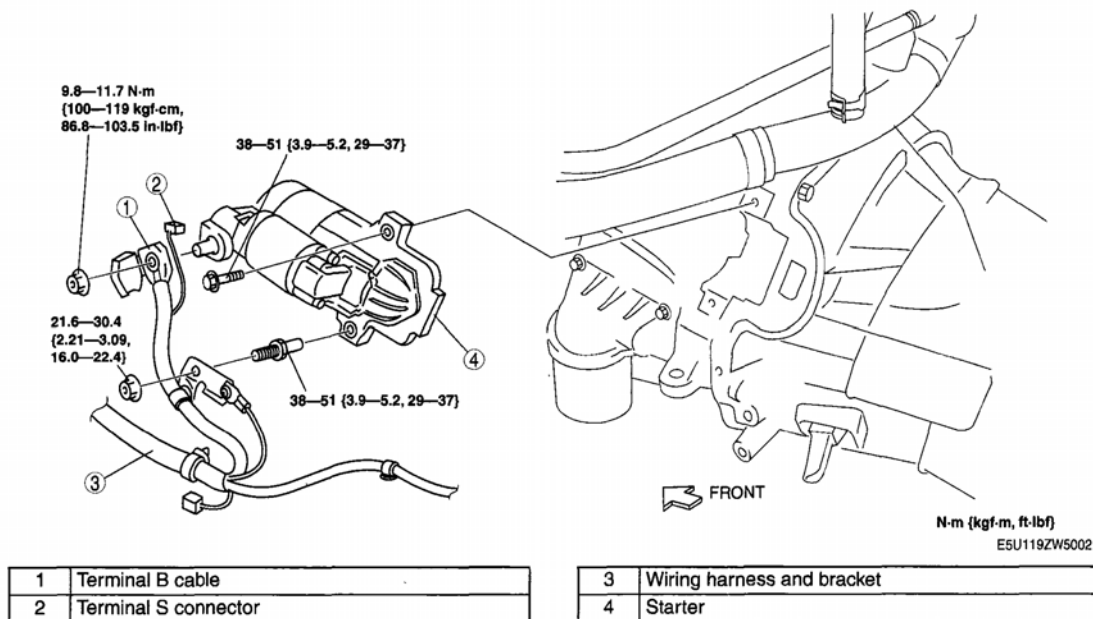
Identifying Removal Order Of Starter (With Torque Specifications)
